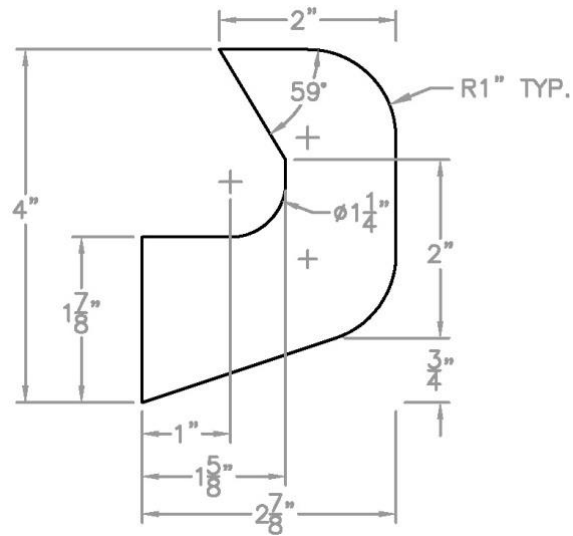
Rigid Cable Bracket Detail, Test No. CMB-3
